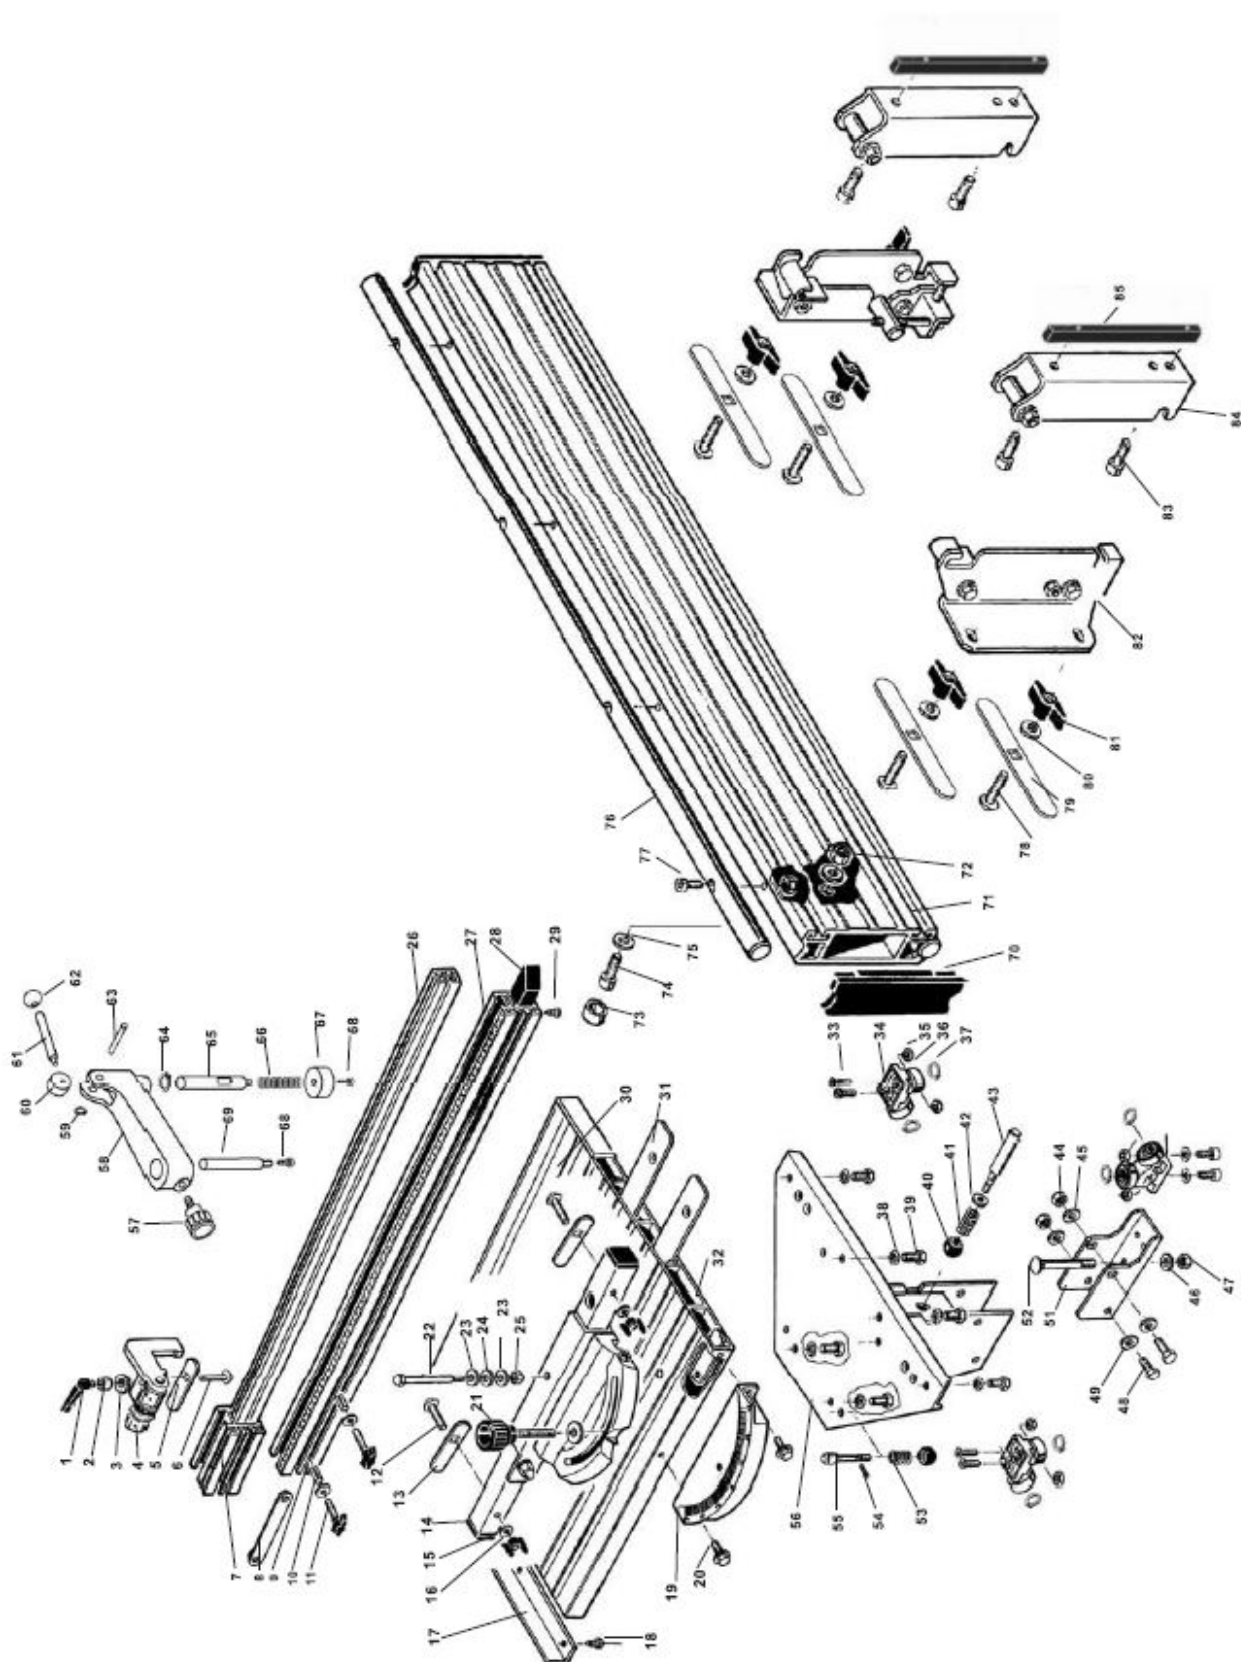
Spare parts drawing 5 - Table router TF 190 SE
